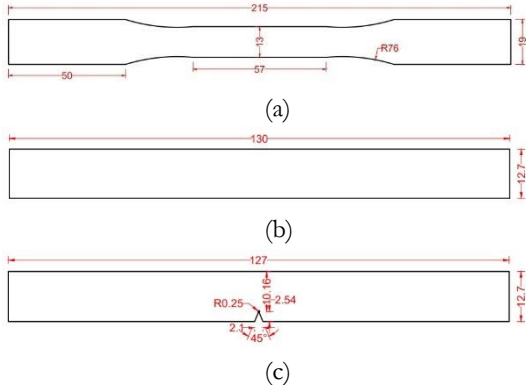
AutoCAD drawing (a) Tensile test specimen, (b) Flexural test specimen, (c) Impact test specimen
